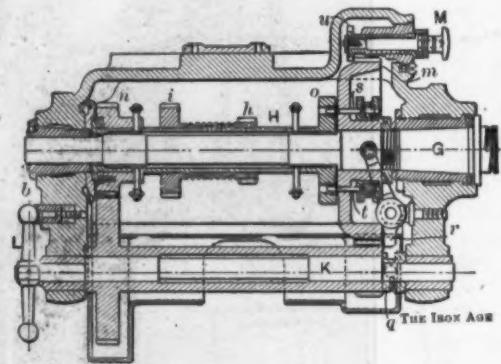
Horizontal Section through Spindle and Back Gears.
